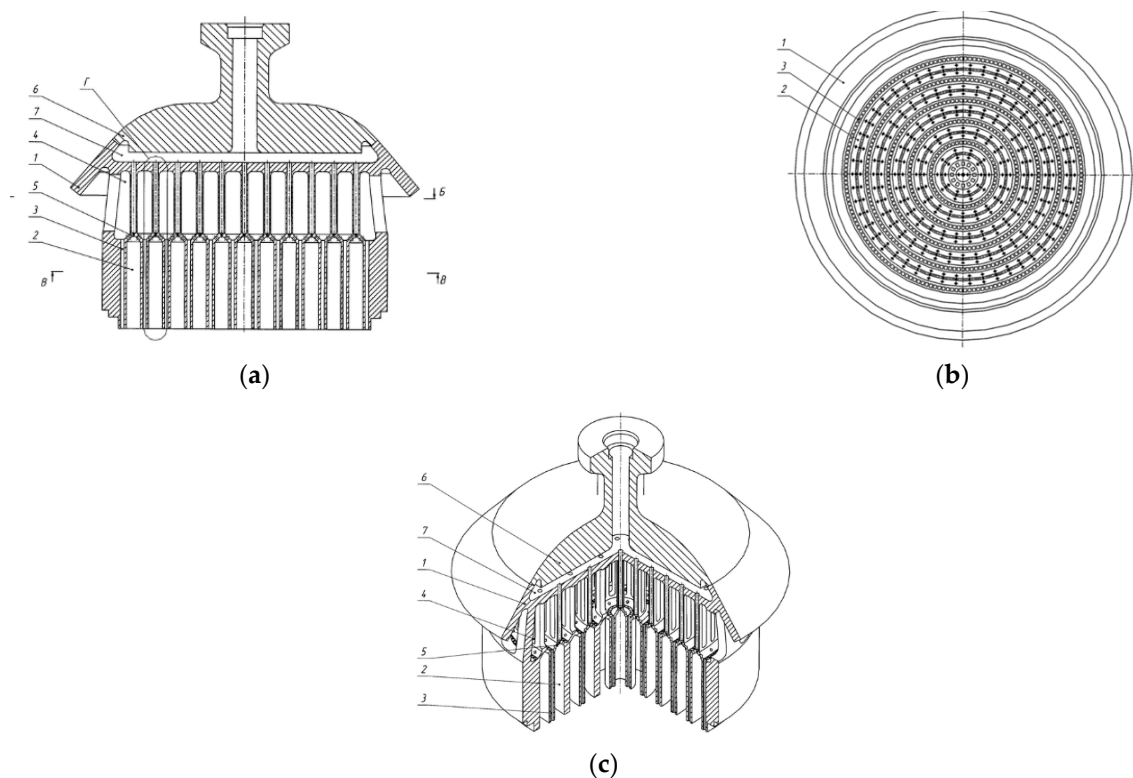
(a) Longitudinal section of the mixing head of a gas generator; (b) Front view of mixing head of a gas generator; (c) Perspective view of a gas generator mixing head. Reproduced from RU Patent No. 2680282C1 in Ref. [187].
